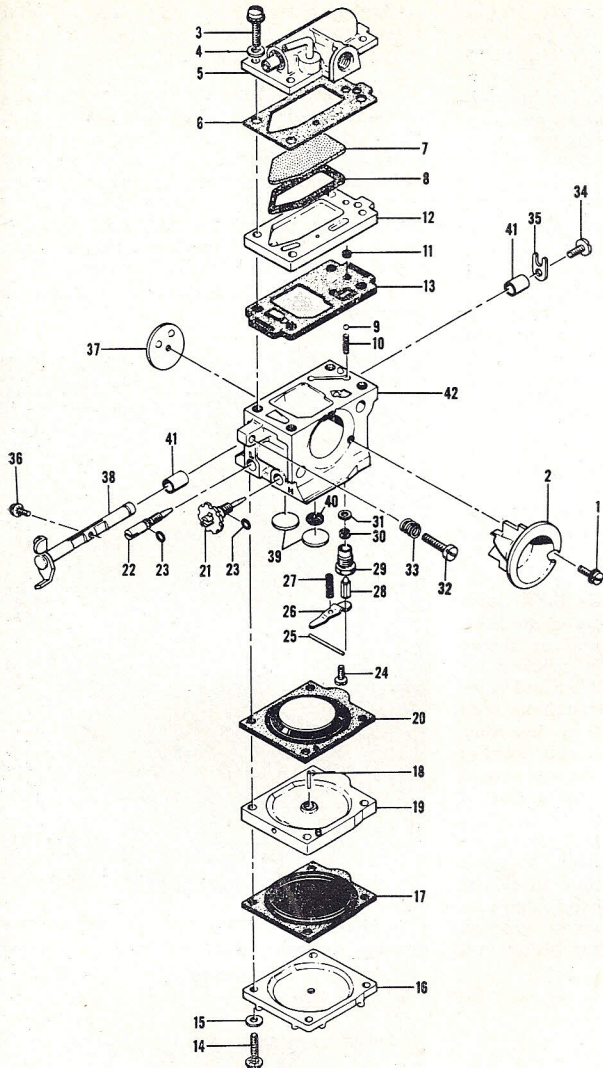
Exploded view of McCulloch carburetor used on model BP-1 chain saw engine.
